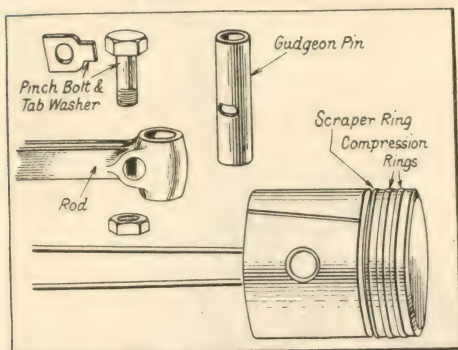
PISTON COMPONENTS OF ARMSTRONG-SIDDELEY ENGINE
